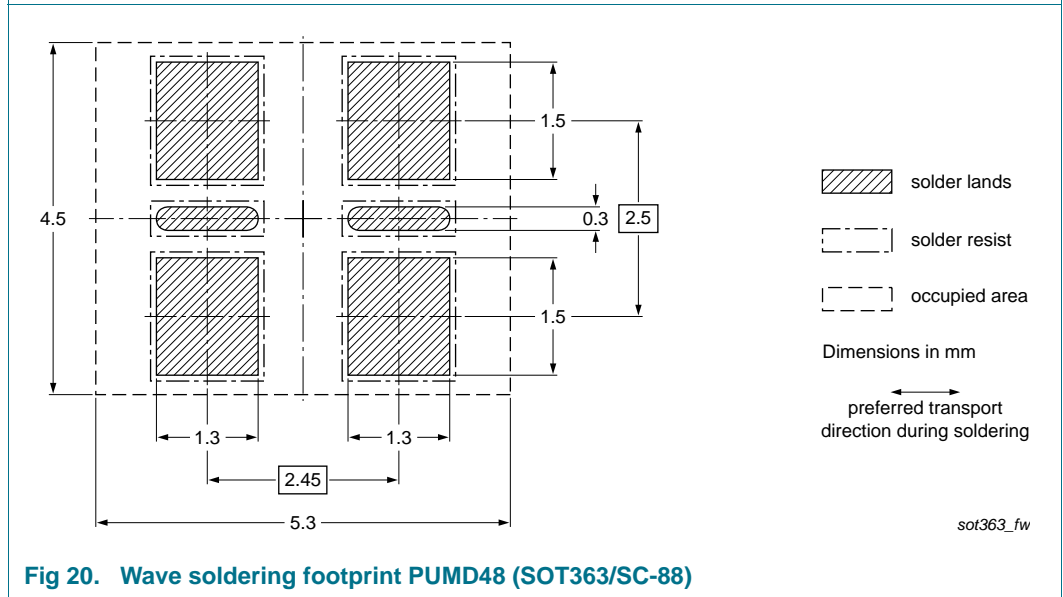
Wave soldering footprint PUMD48 (SOT363/SC-88)
